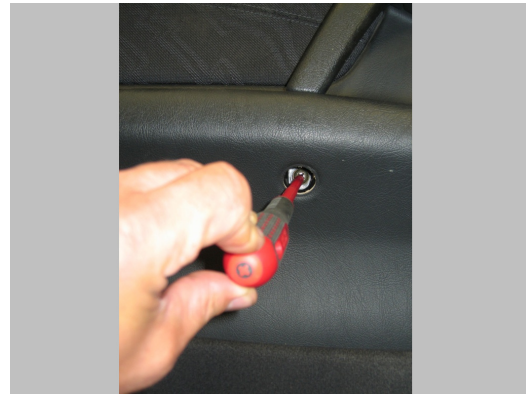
Step 6: the screw below the arm rest must be unscrewed and removed. (photography by Clemens Günther)
